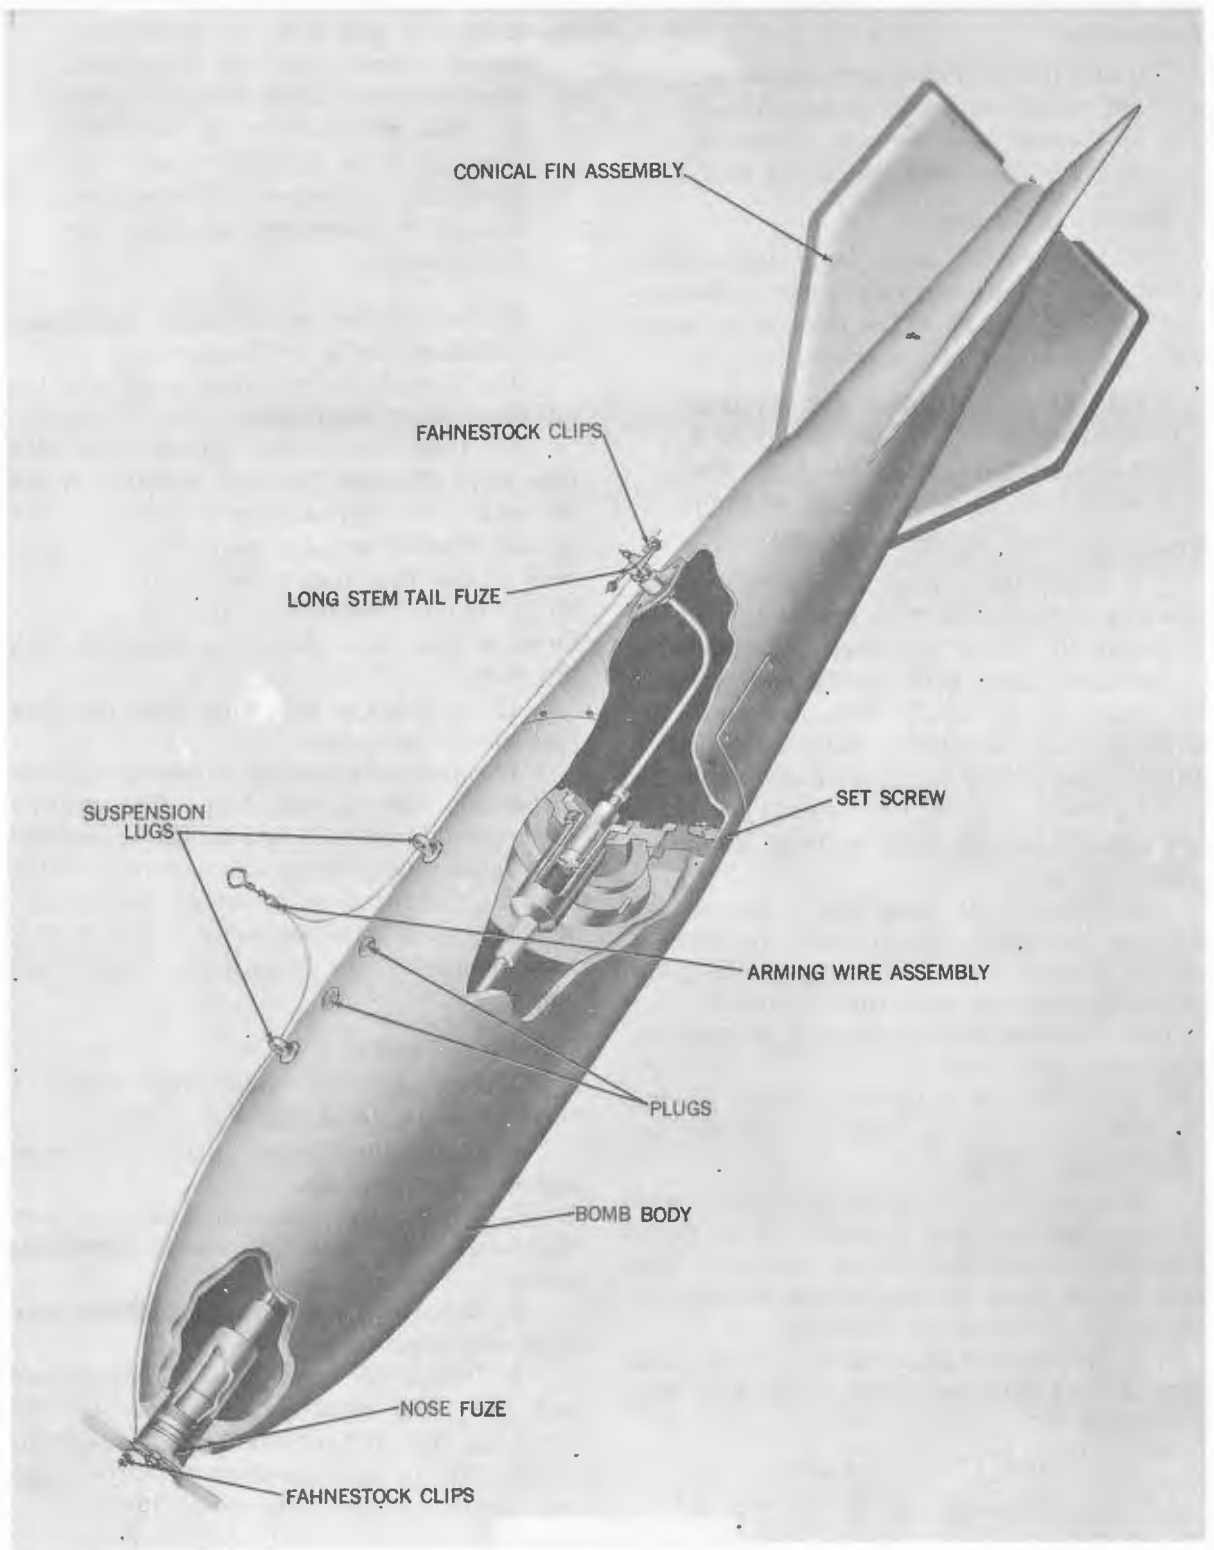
750-lb Demolition Bomb M117 (Mechanically Fuzed), Cutaway View.
